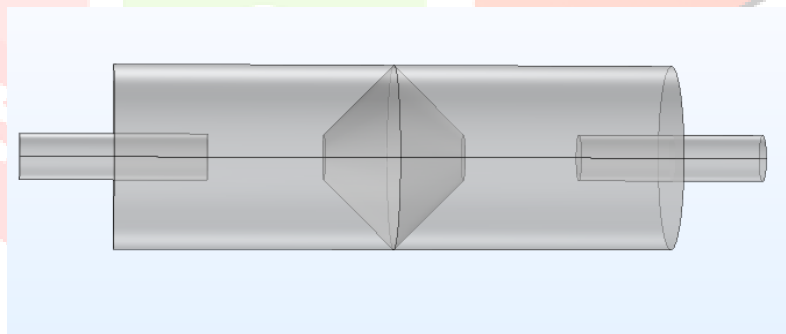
Model 9) Extended tube muffler Combined with cone -1
